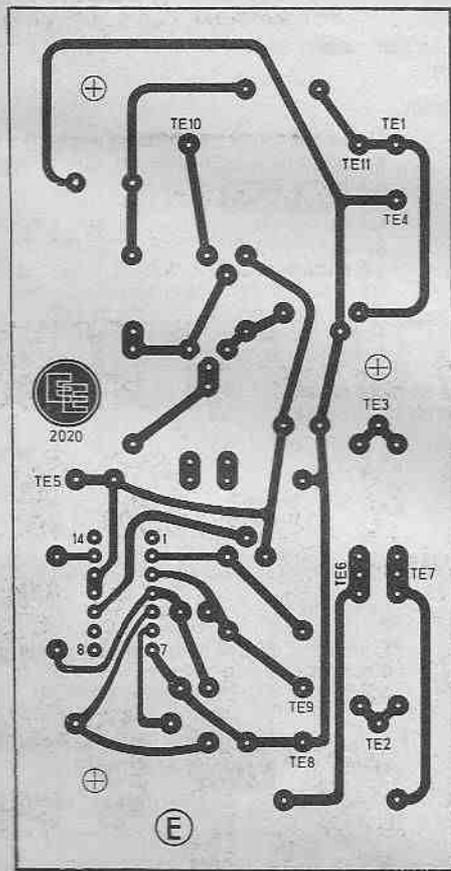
Board E of the 2020 Tuner Amplifier: underside view showing printed circuit (full size).
